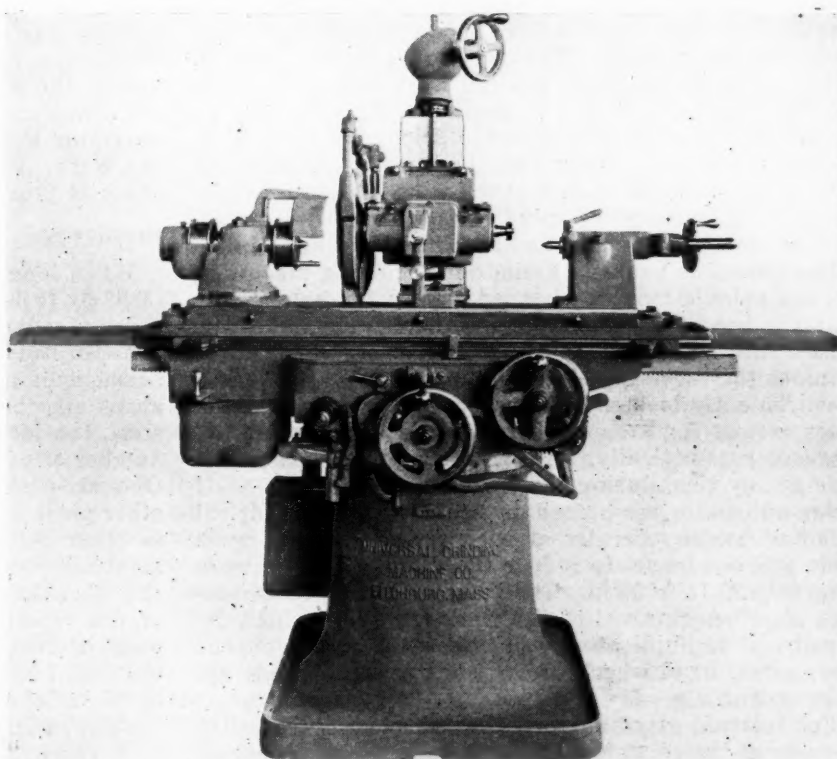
A typical universal grinding machine equipped for cylindrical grinding
